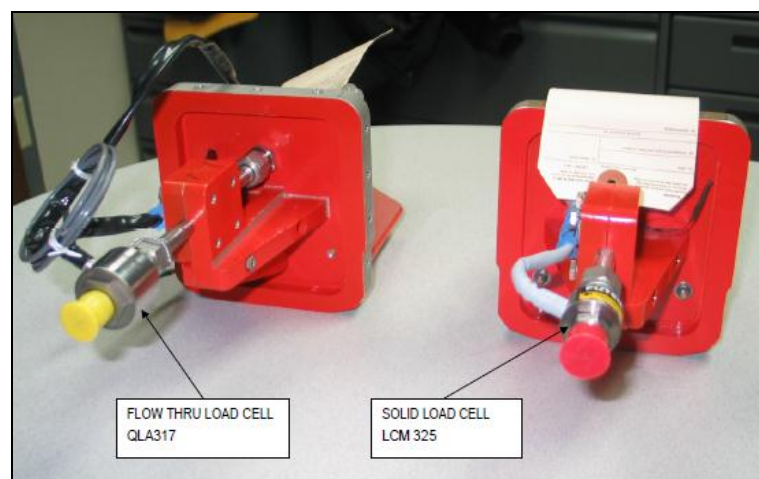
Pressure Tube Attachment Assemblies with Flow-Thru (Left) and Solid (Right) Load Cells Installed
